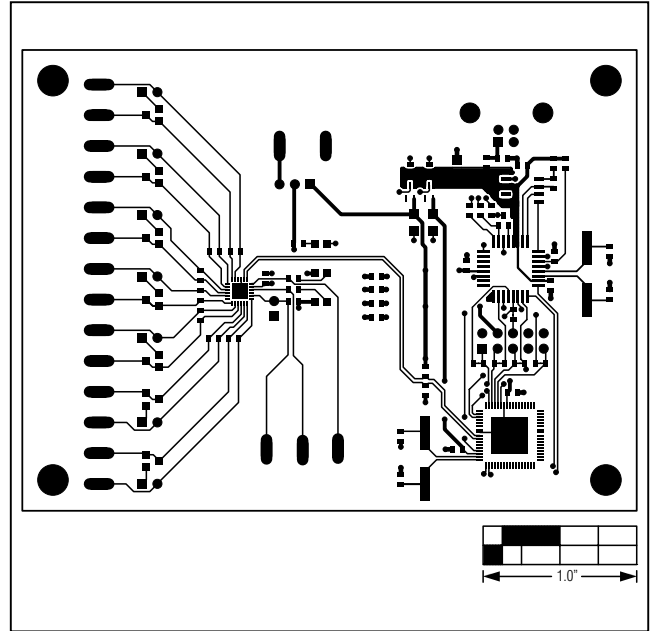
MAX6581 EV Kit PCB Layout—Component Side
